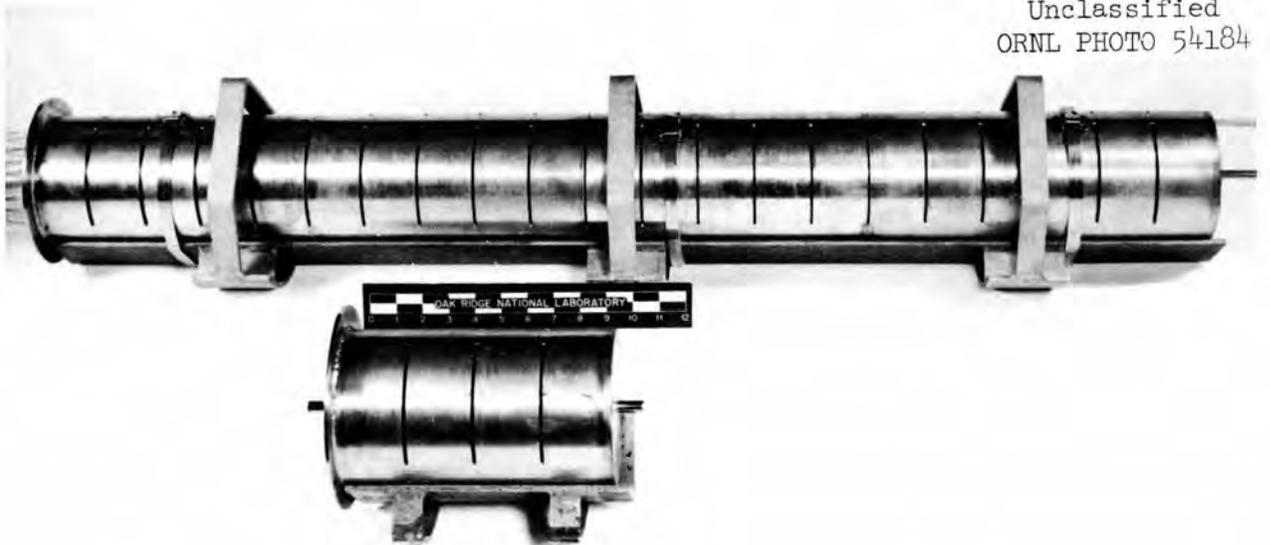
Boiler and Job Sample in Place on Brazing Jigs Prior to Brazing.
